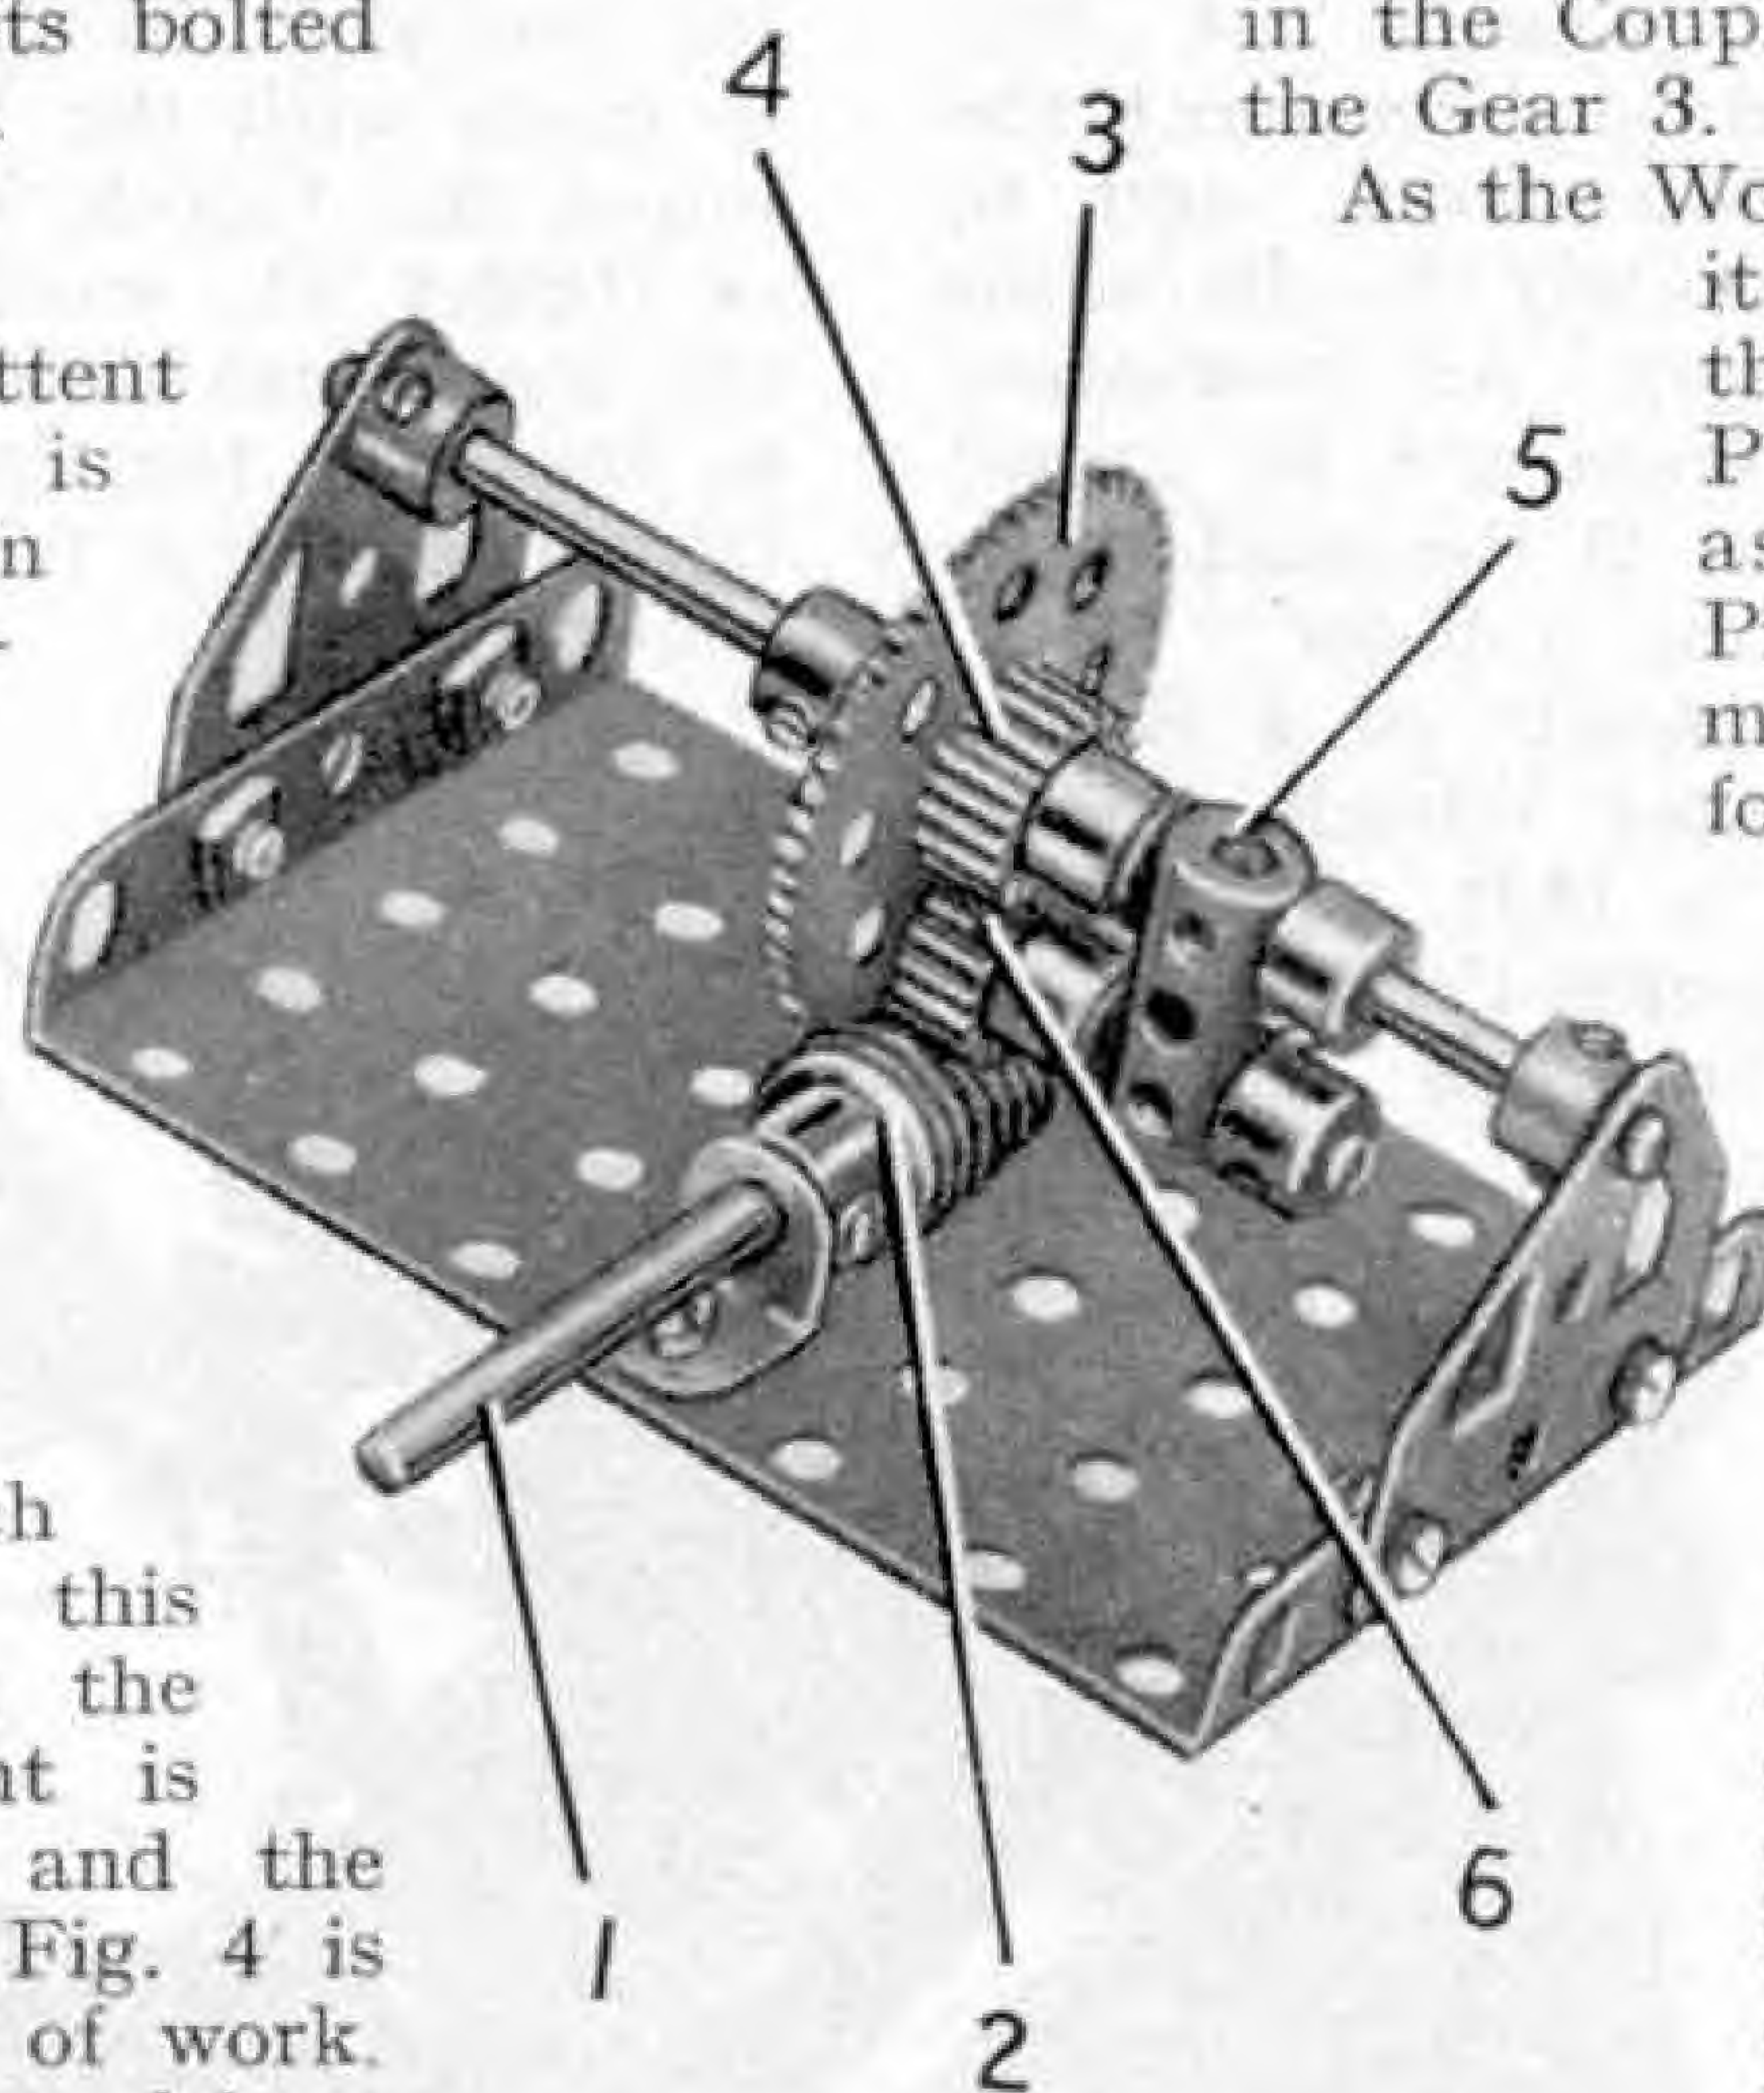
This gear-operated intermittent motion mechanism is suitable for use in connection with the feed mechanisms of many models such as machine tools.
